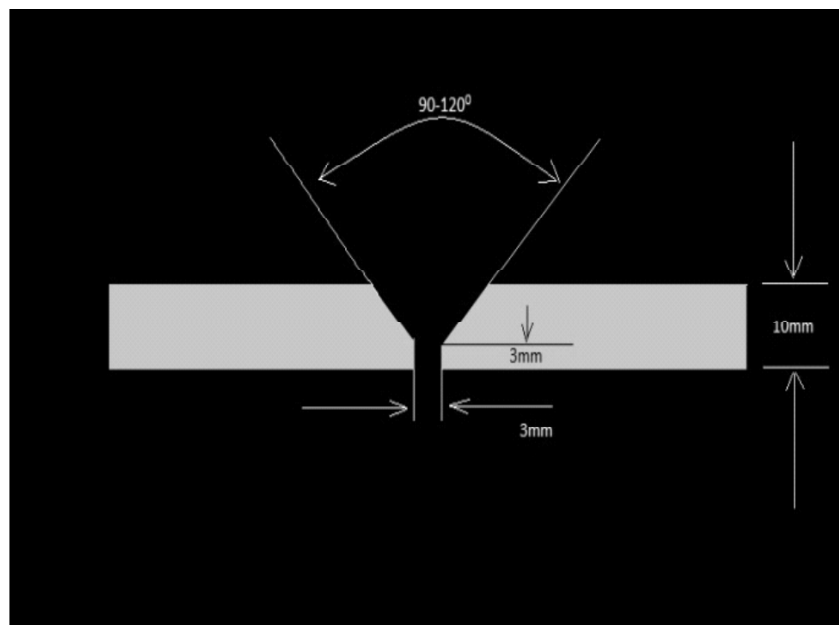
Welding parameters for arc welding for butt joint.
